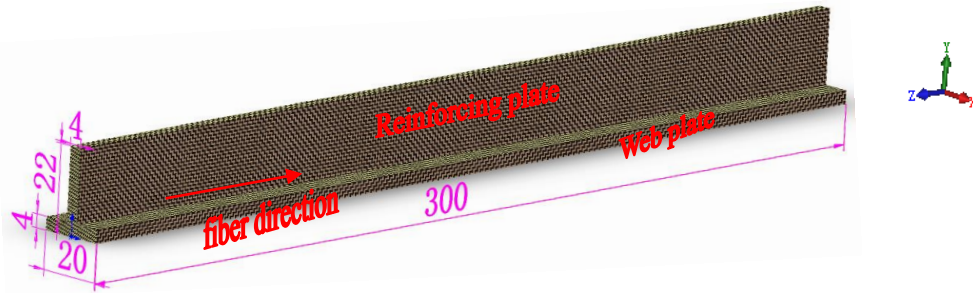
Geometry of a T-beam specimen (Unit: mm).
